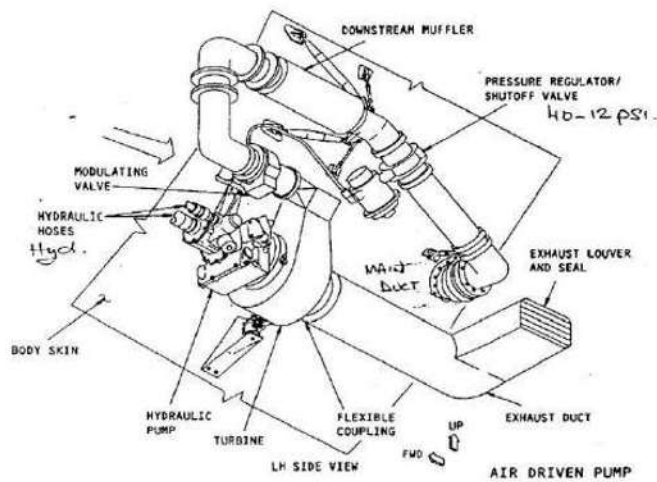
Typical Air Turbine Motor driven hydraulic pump. (ATDP)
